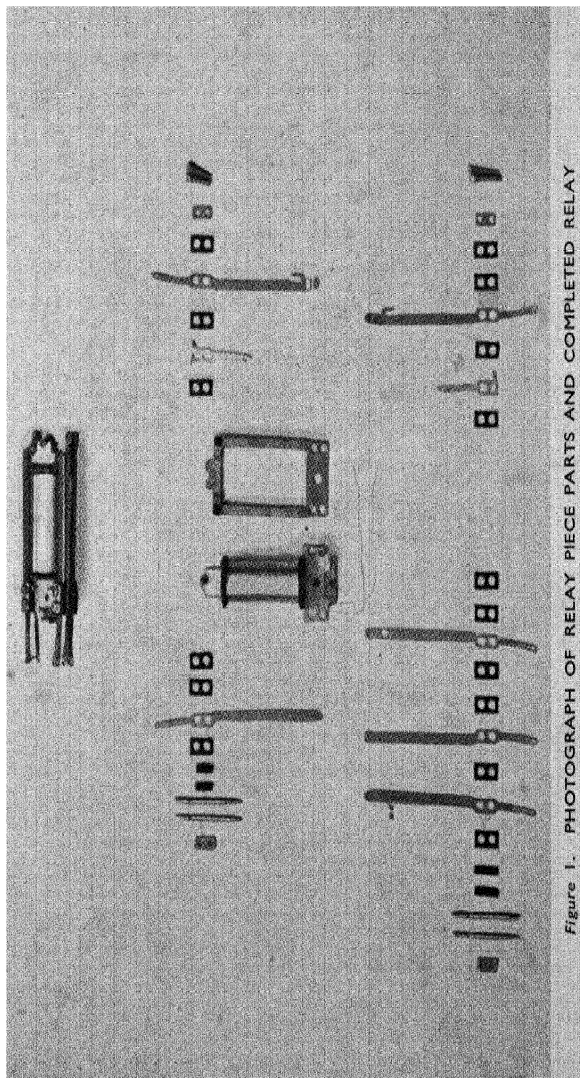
PHOTOGRAPH OF RELAY PIECE PARTS AND COMPLETED RELAY
